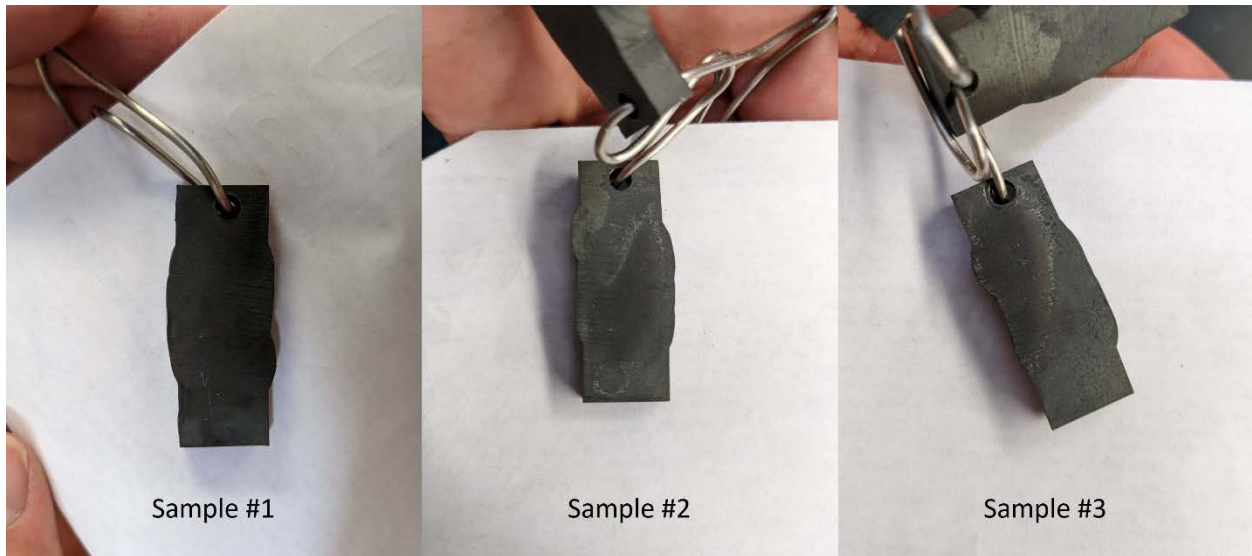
Appearance of pre-corrosion welded samples.
